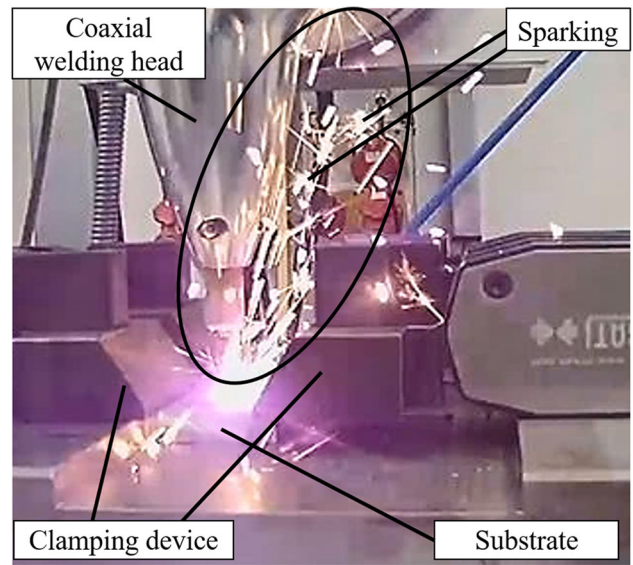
Sparking during LHWC without a process chamber using welding parameter set S2
